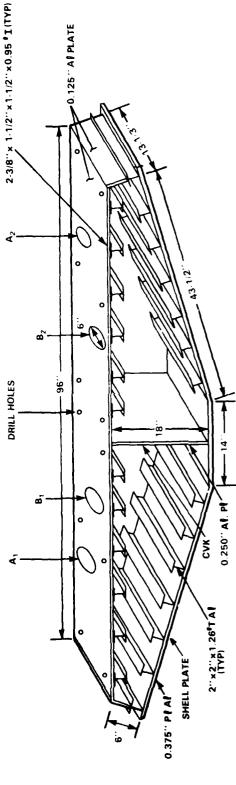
Section Showing Frame 72 As-Built and after Structural Modifications
